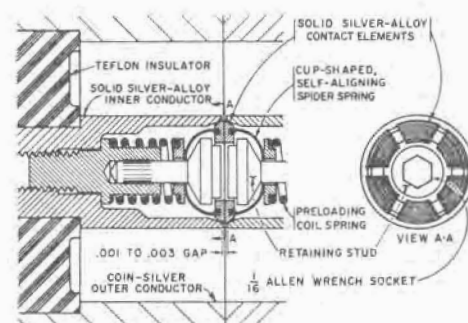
Cross-section view of the connector showing contact surfaces of two mated inner conductors.
